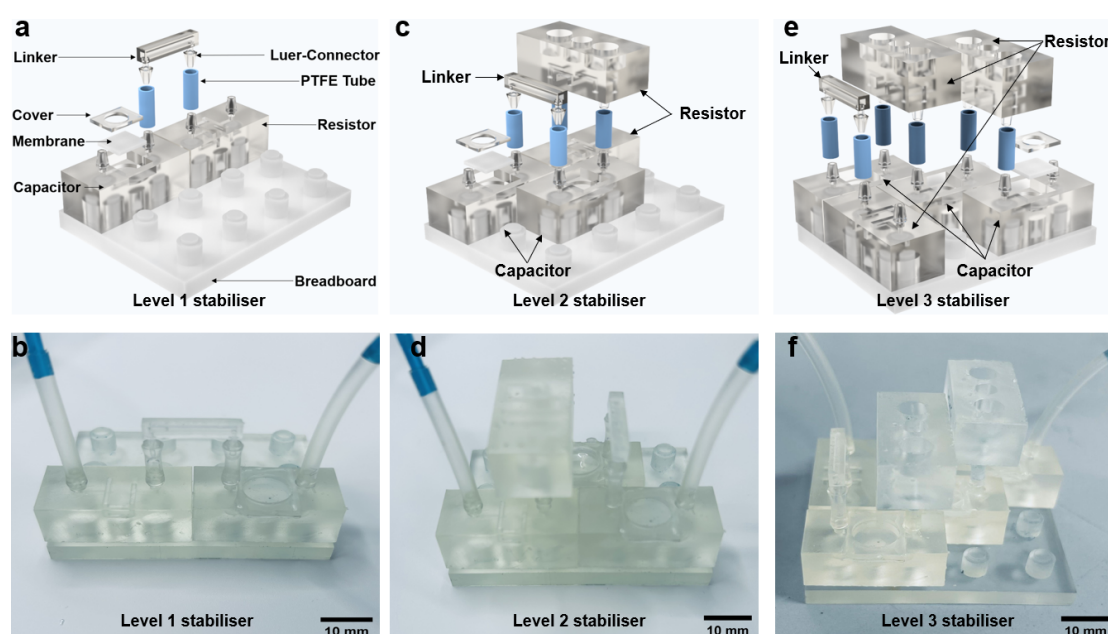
The exploded view of the modular microfluidic stabiliser system: (a) the exploded view of level 1 Lego-like stabiliser system; (b) the assembled level 1 Lego-like stabiliser system; (c) the exploded view of level 2 Lego-like stabiliser system; (d) the assembled level 2 Lego-like stabiliser system; (e) the exploded view of level 3 Lego-like stabiliser system; (f) the assembled level 3 Lego-like stabiliser system.
